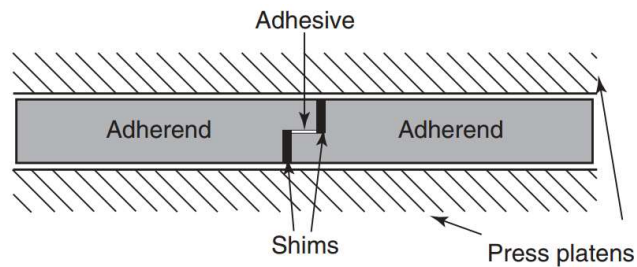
Schematic view of the mould with the TAST specimens [48]
